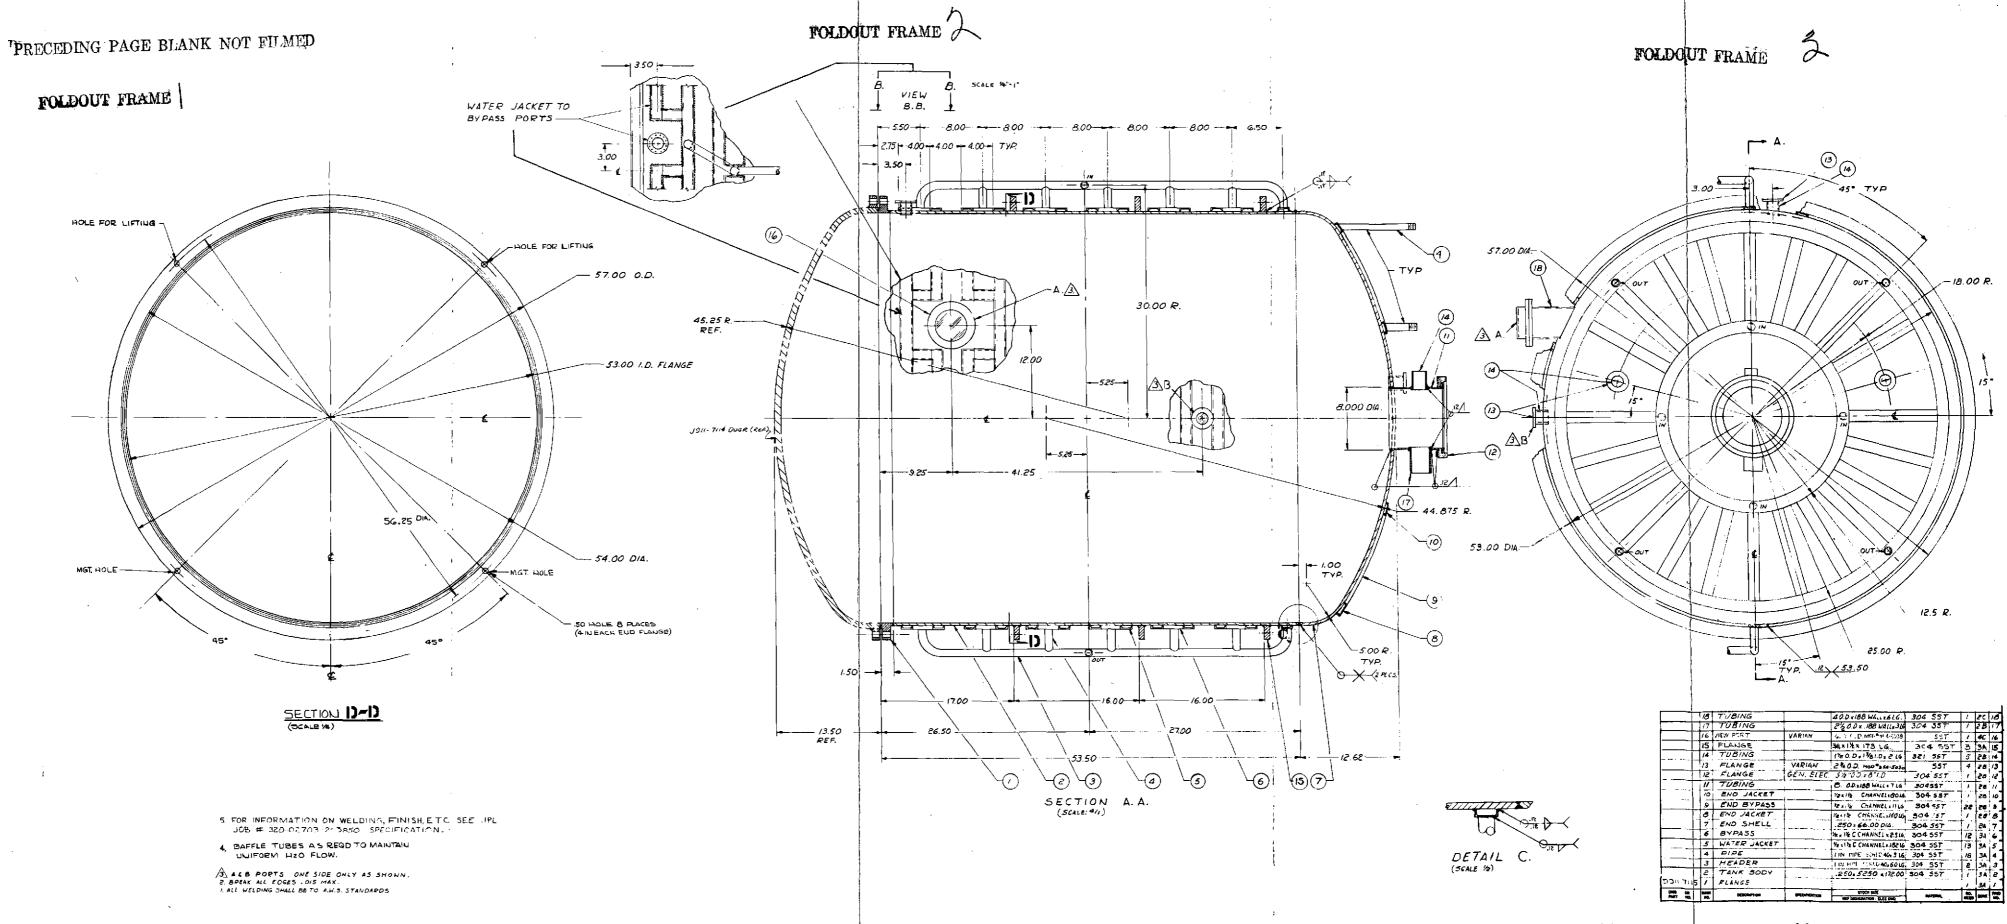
Vacuum tank assembly - 100-kW erosion loop
